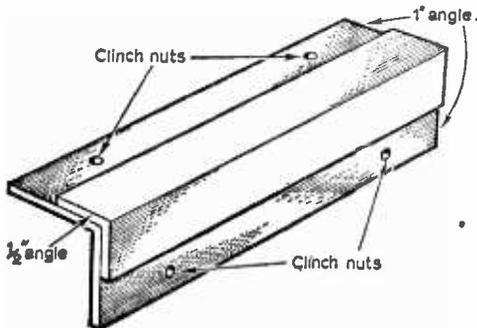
1/4 in. and 1 in. angled metal bolted together with countersunk bolts can be used to make a cabinet frame.
